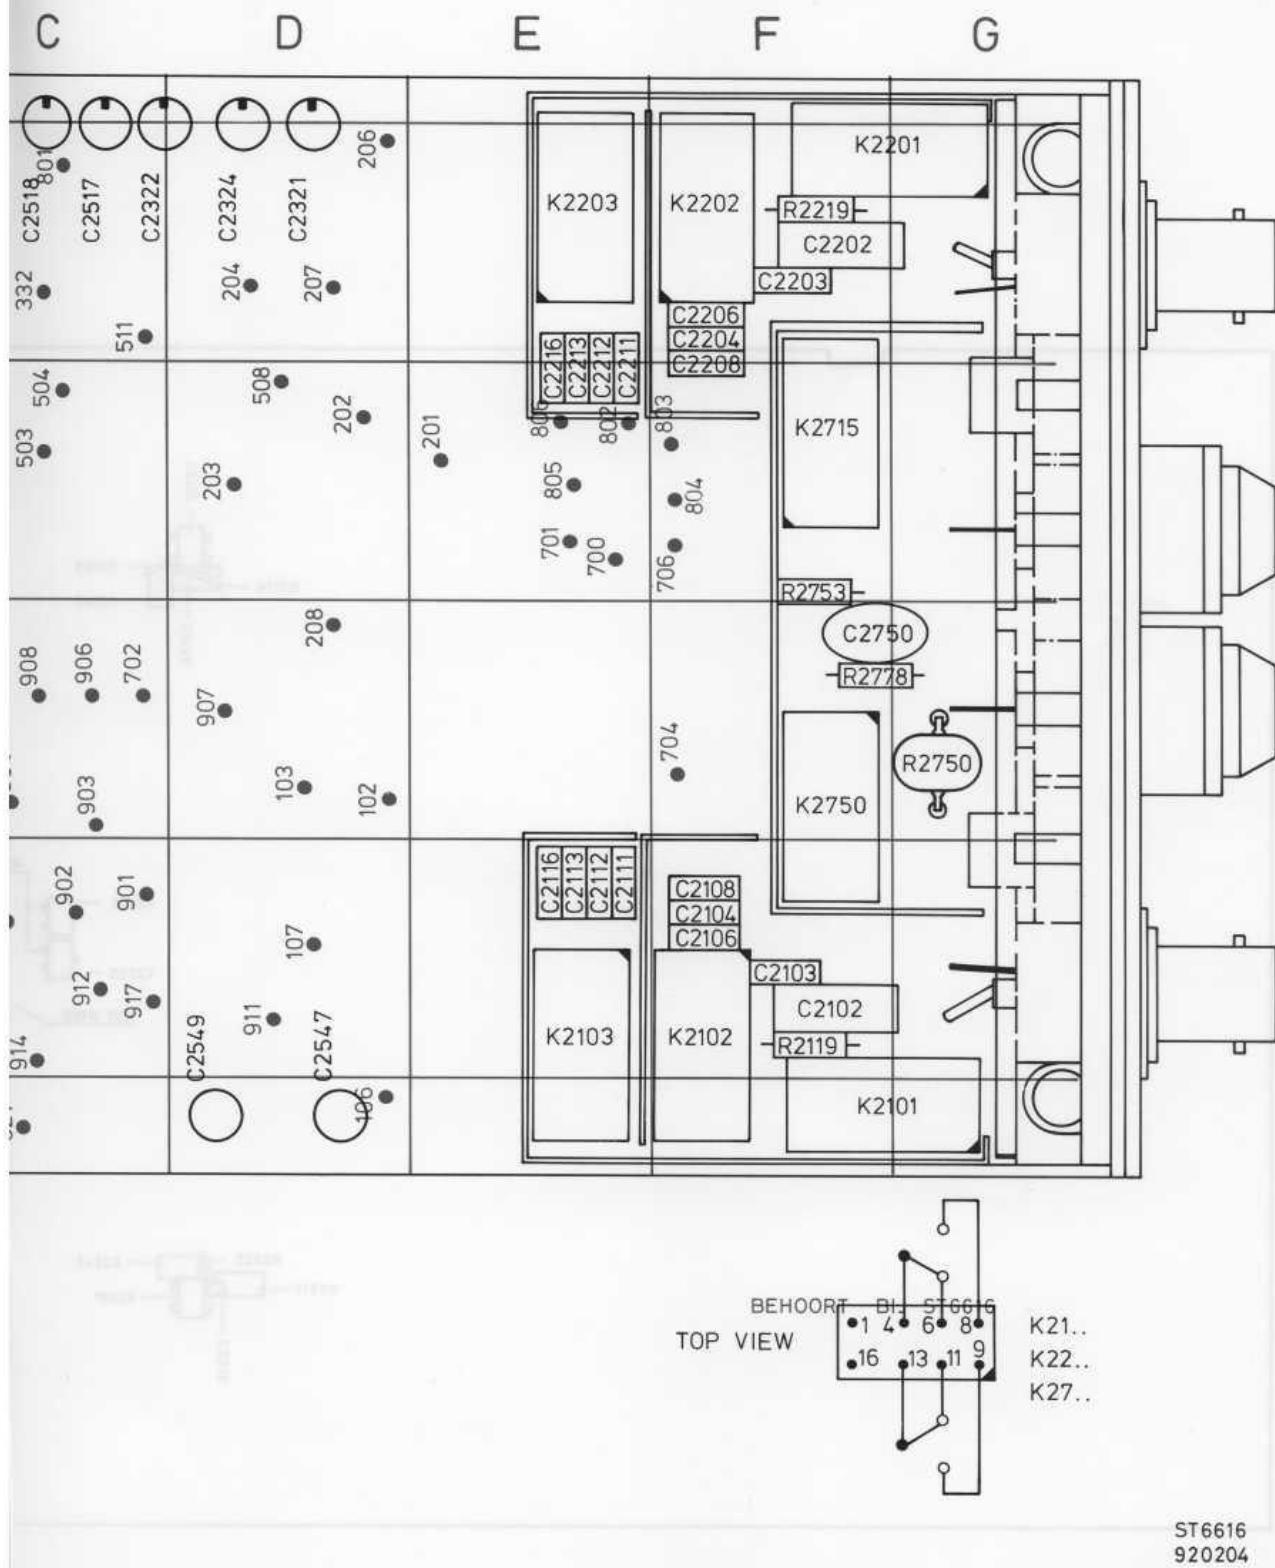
Analog A2 PCB assembly (Wired components side)
